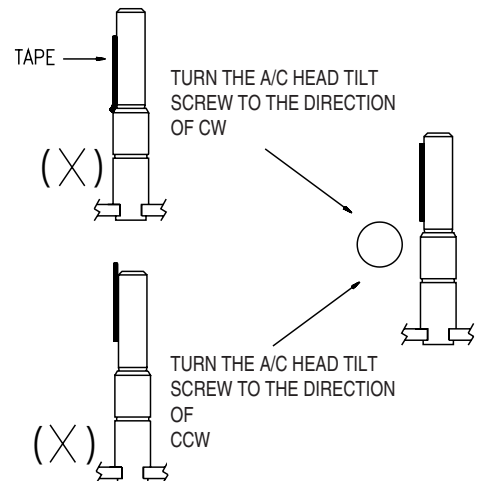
A/C HEAD ASS'Y ADJUSTMENT
